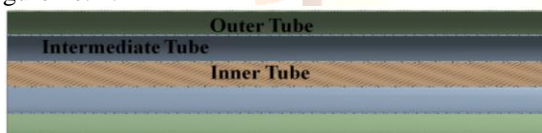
CAD model without baffles for concentric tube triple tube heat exchanger
